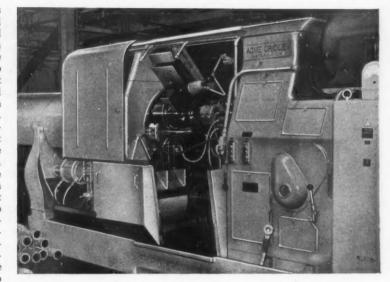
One of the Large Acme-Gridley 4-spindle Automatics, Recently Installed for Machining Races from Tube up to $7\frac{\pi}{4}$ in. Diameter
